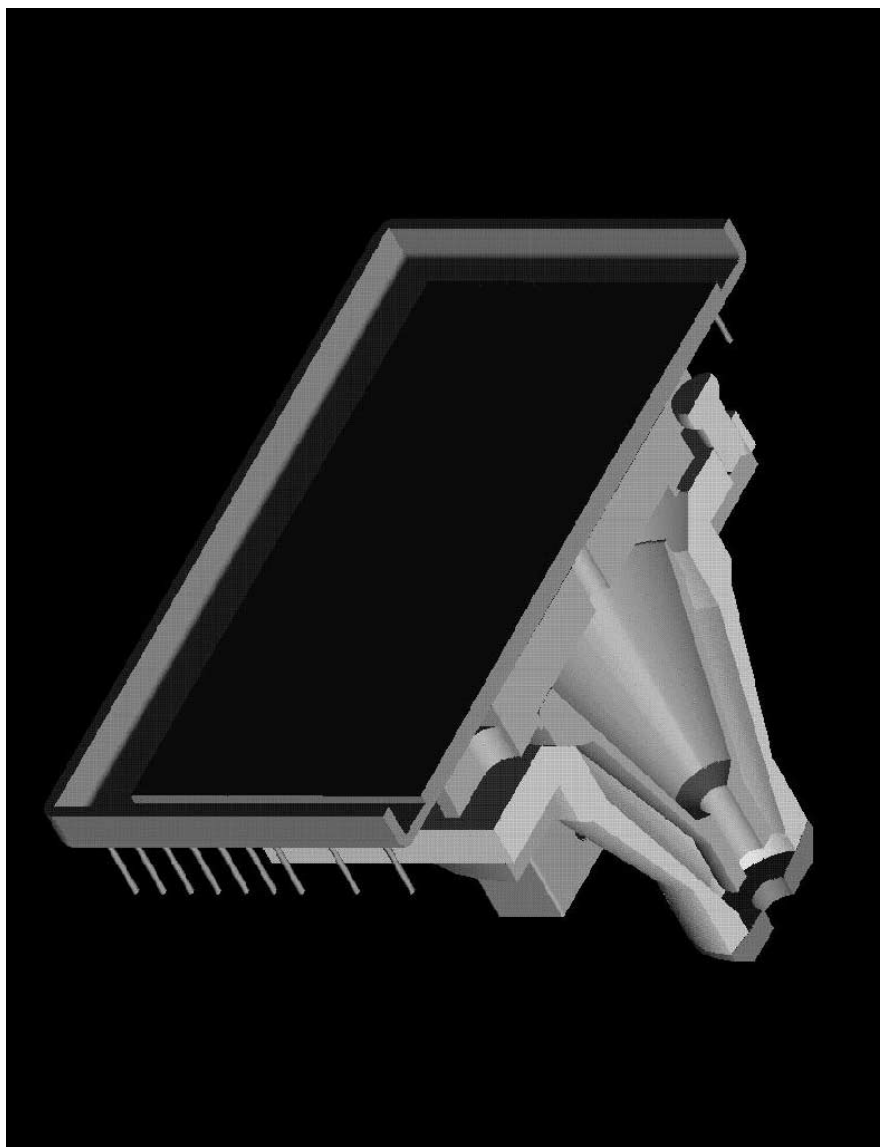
Pro/Engineer CAD drawing of the CCD on its mount, here displayed as a cutaway. The ball-and-cone socket nature of the mount can be seen, as well as the Kovar stiffener to which the CCD is cemented.
